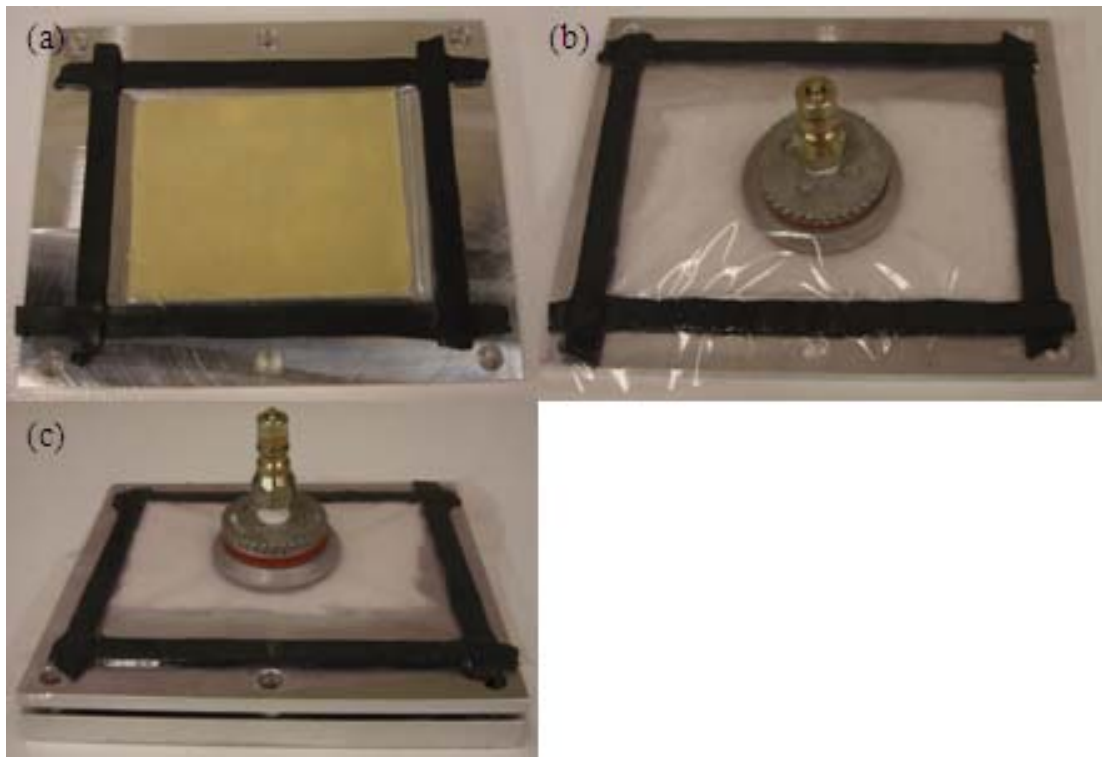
Manufacturing procedure for resin plates made from LEO resin films: (a) resin plies placed into mould cavity (b) bleeders and vacuum port vacuum bagged onto cover and (c) cover sealed onto mould
